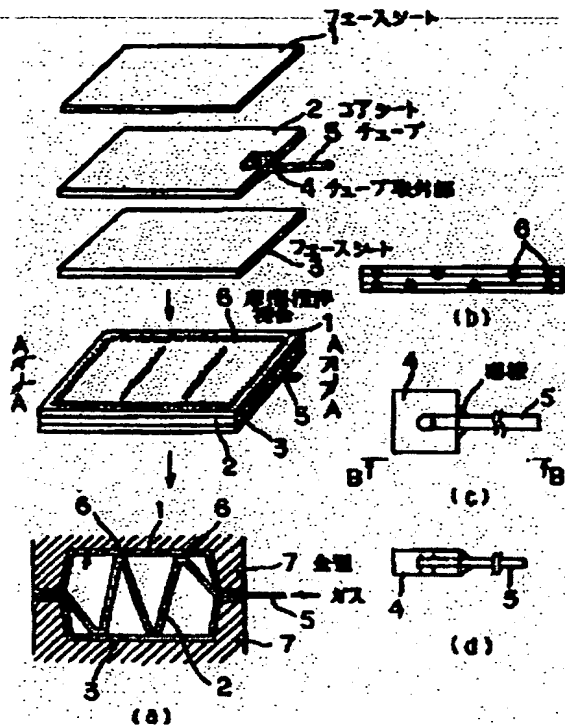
It is the explanatory view of the 1st example of the manufacture approach of the conventional aluminum containing alloy panel.
